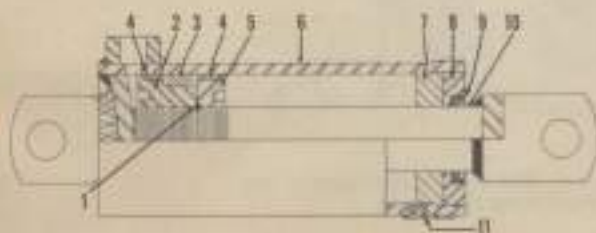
Cross sectional view of lift arm cylinder used on Series IV D-17 tractors.
